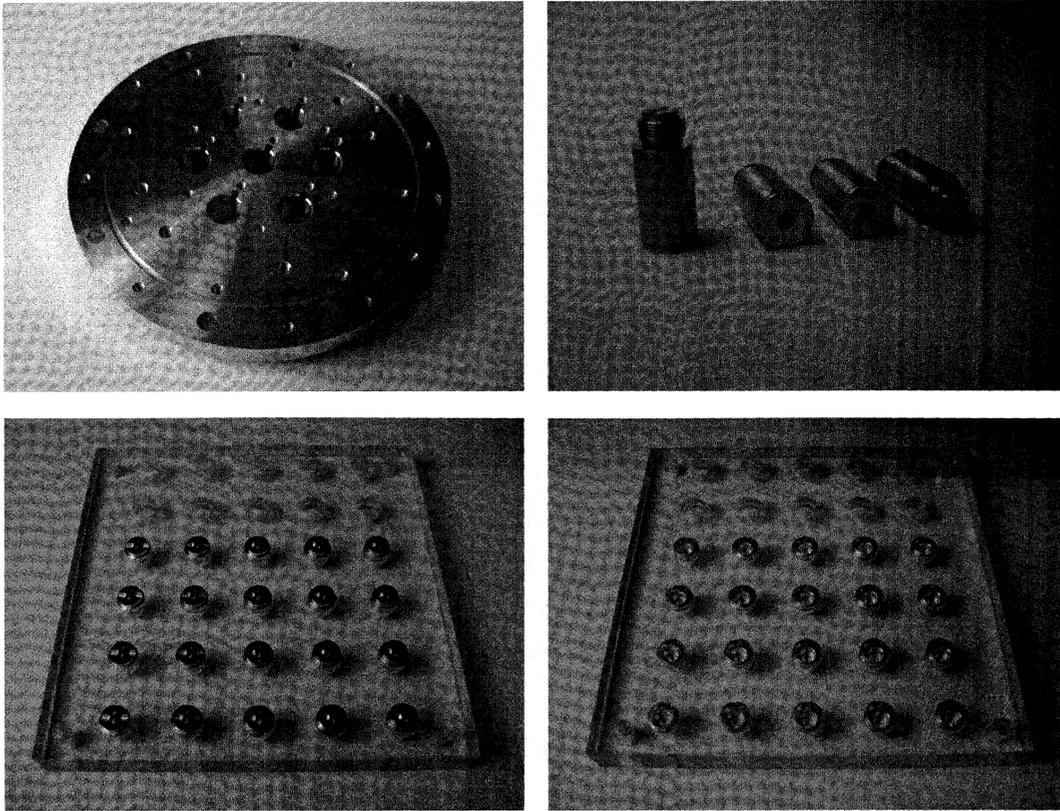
Manufactured parts for the CHAMP+ low band array. Left to right, top to bottom: mixer clamp plate; corrugated horns; mixer back pieces front view and back view.
